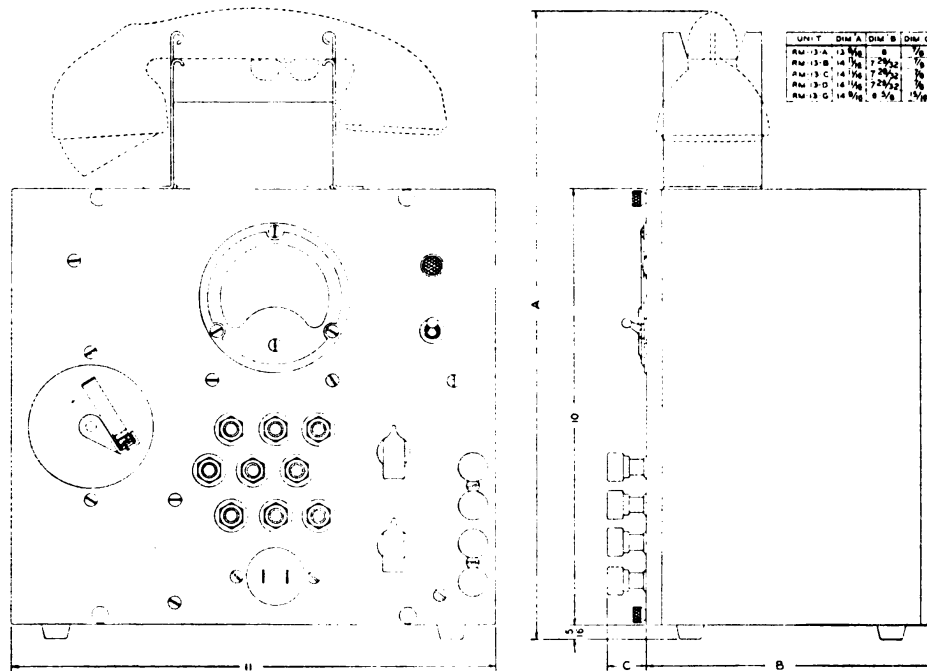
Remote Control Unit RM-13-(\*)—outline dimensions
